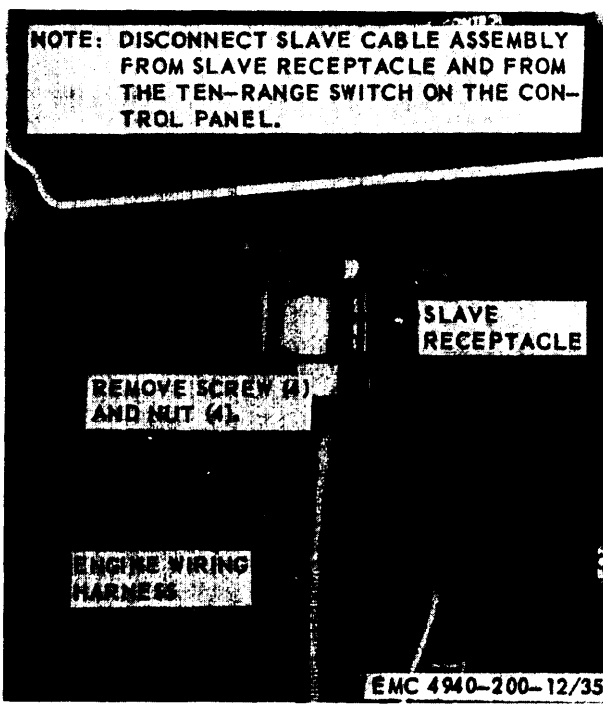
Slave receptacle and slave cable assembly, removal and installation.
